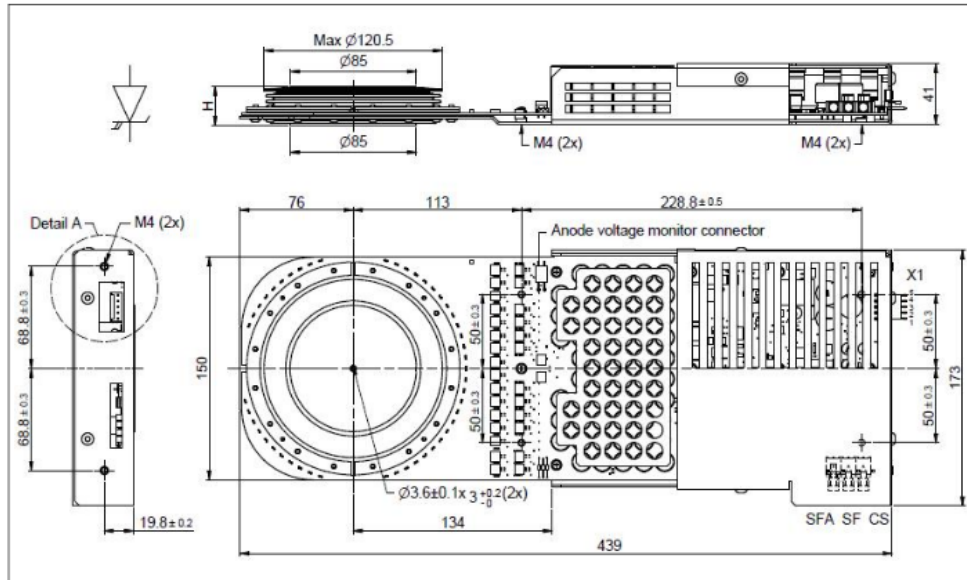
Outline drawing; all dimensions are in millimeters and represent nominal values unless stated otherwise
